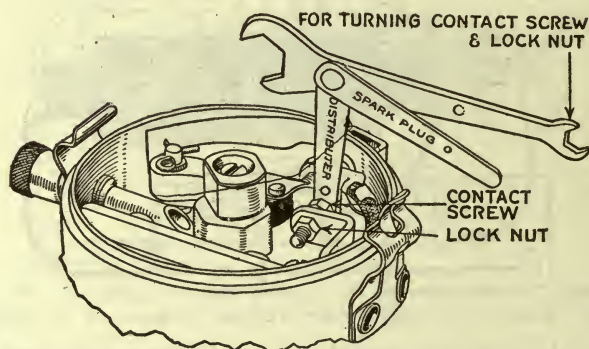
Adjusting Distributor Points and testing with thickness gauge.
